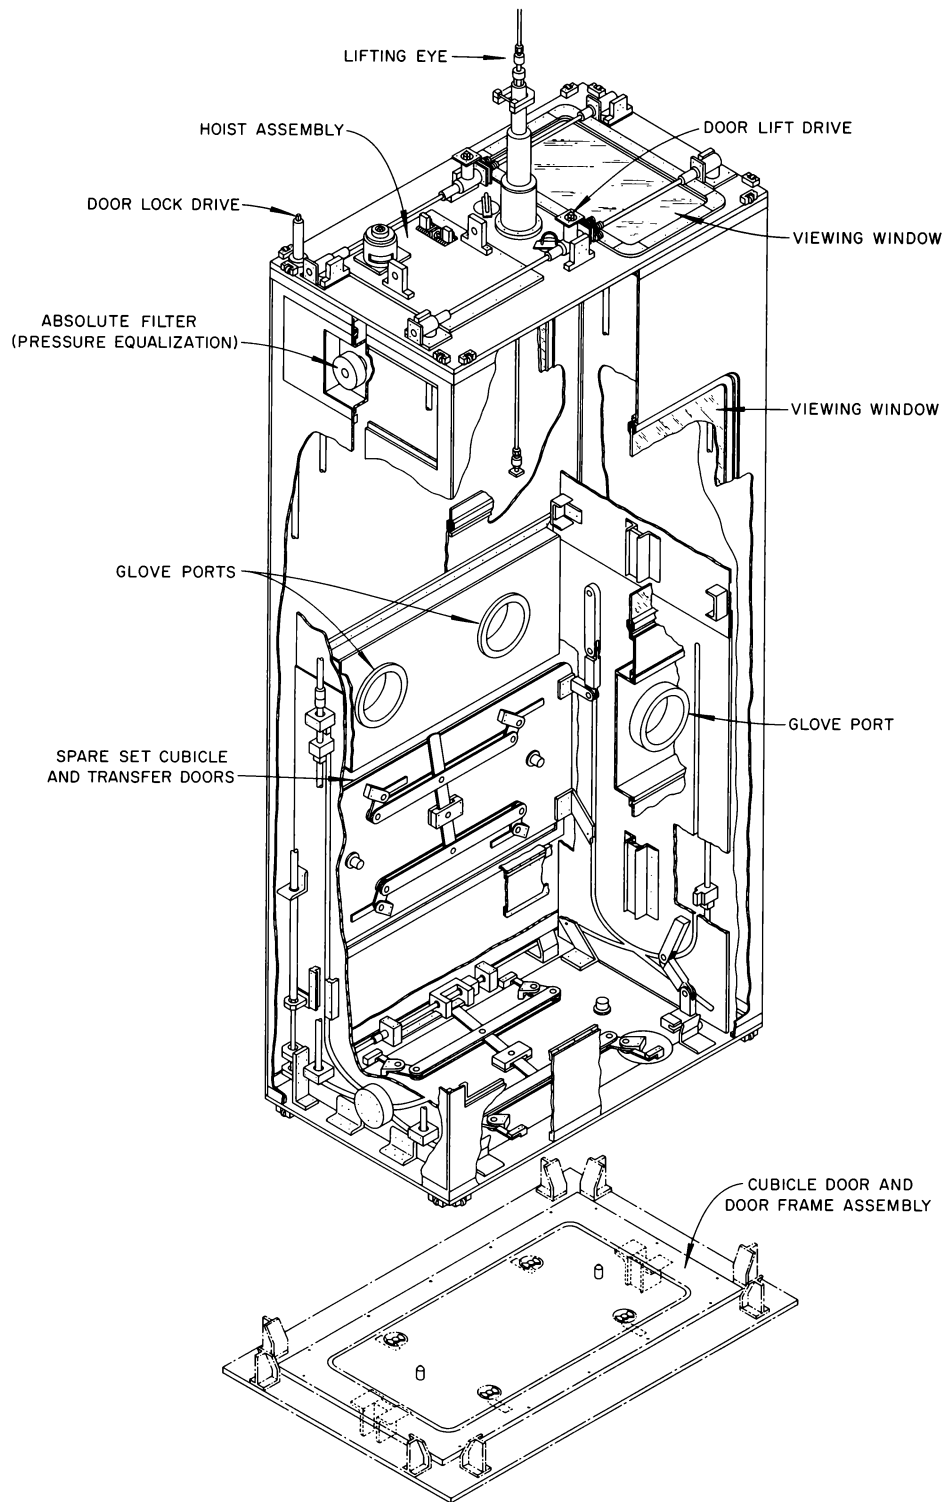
Cutaway View of Equipment Transfer Case.
